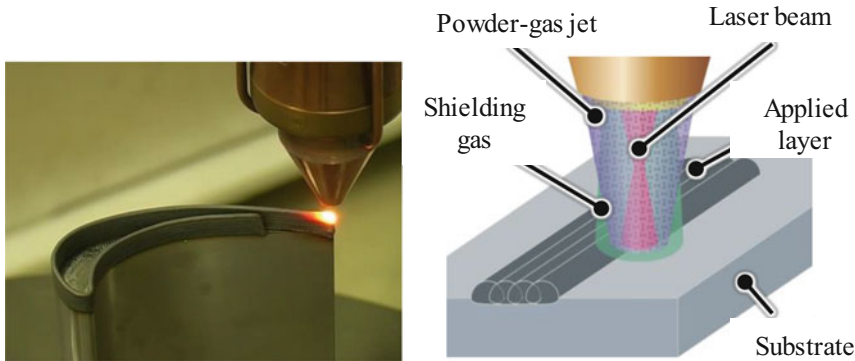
Repair of a turbine blade using LMD (left), (source: Fraunhofer ILT); process principle of the LMD process (right), (source: Fraunhofer ILT)
